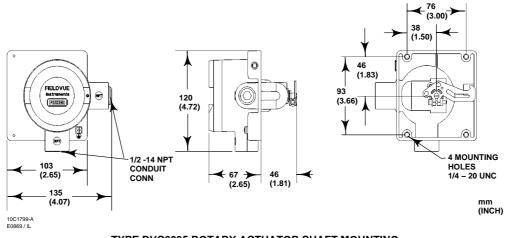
Dimensions for Remote-Mounted Instruments—Type DVC6005 Base Unit
